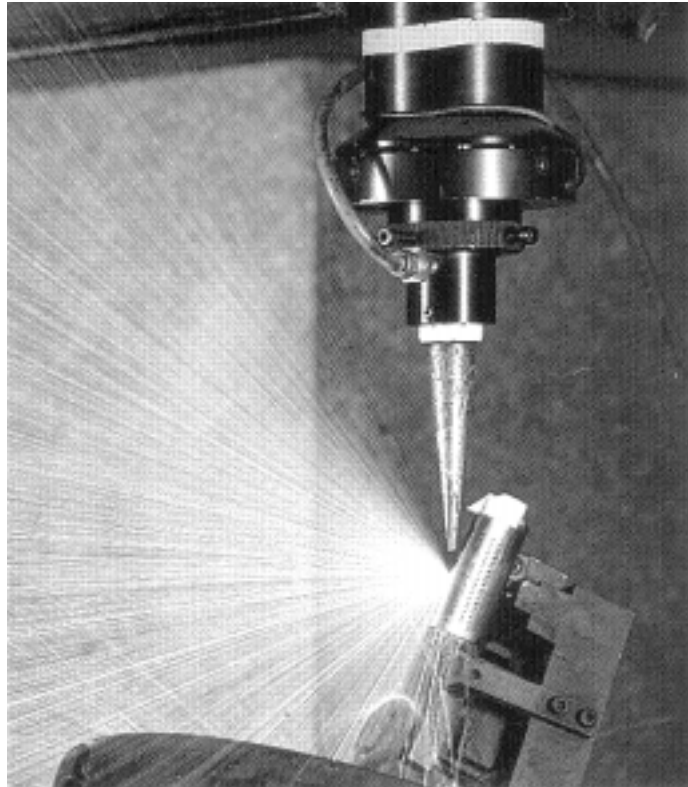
Laser Hole Drilling of Film-Cooling Holes in a Blade Surface (Picture Reproduced with Kind Permission of UNC Johnson Technology, Muskegon, Michigan, USA)
